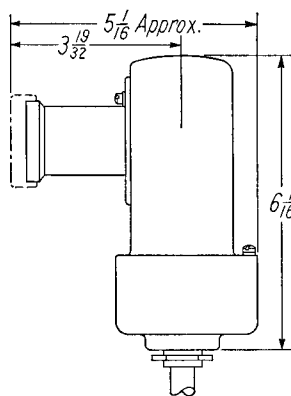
TYPES A AND B PHOTOTUBE HOUSINGS
